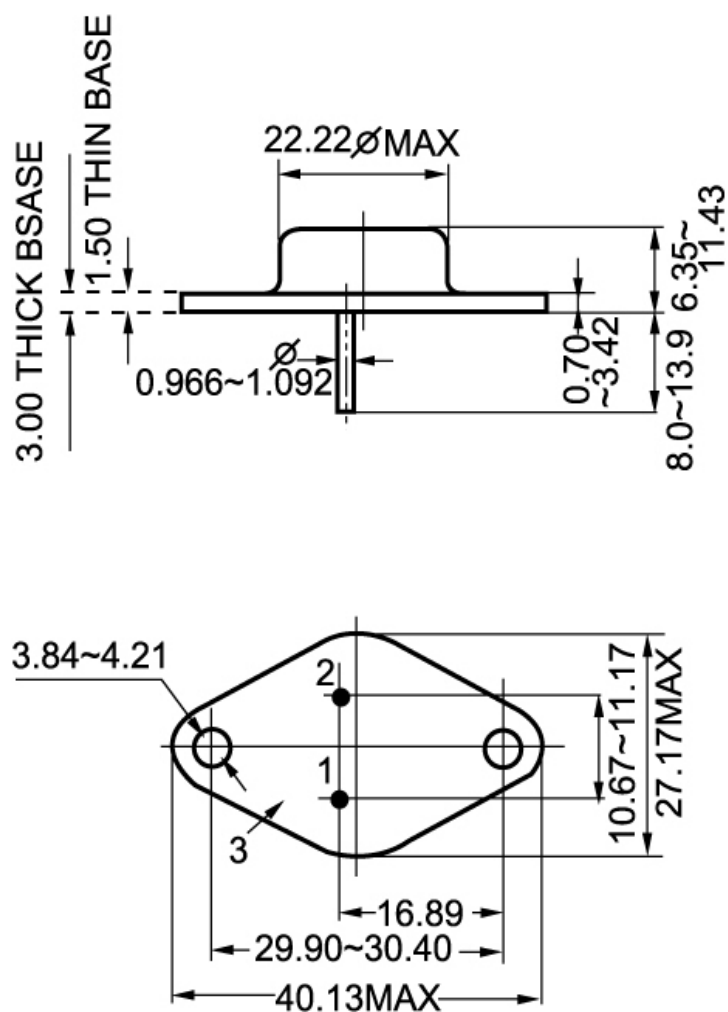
outline dimensions (unindicated tolerance:±0.10mm)
